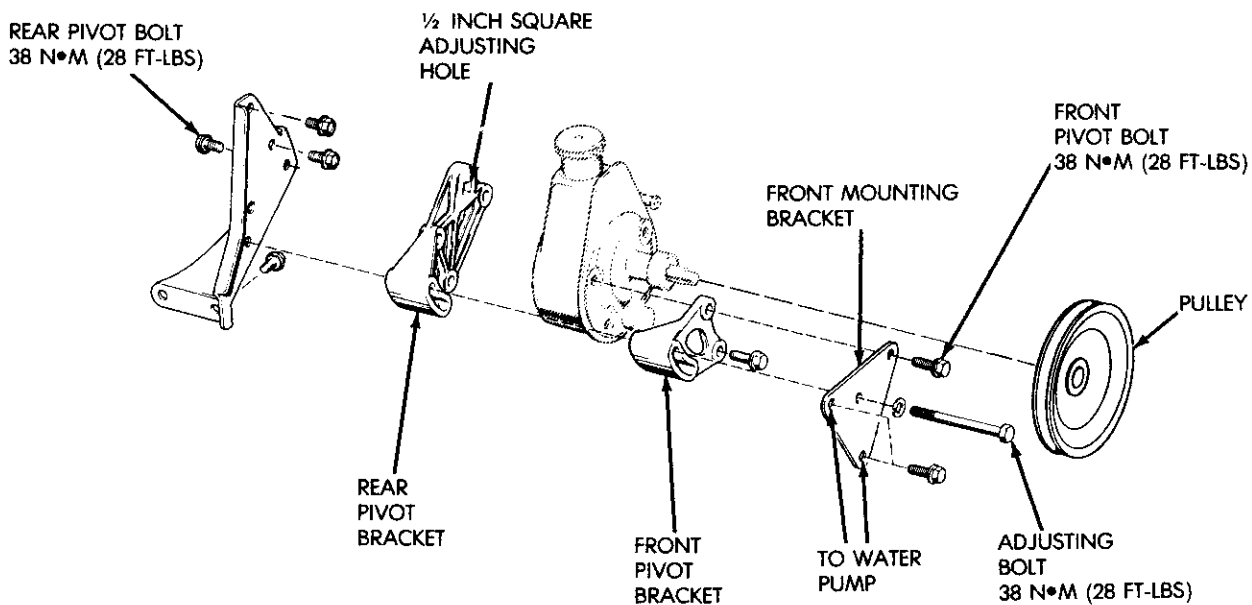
Power Steering Pump Drive V-Belt Adjustment—2.5L and 4.2L
